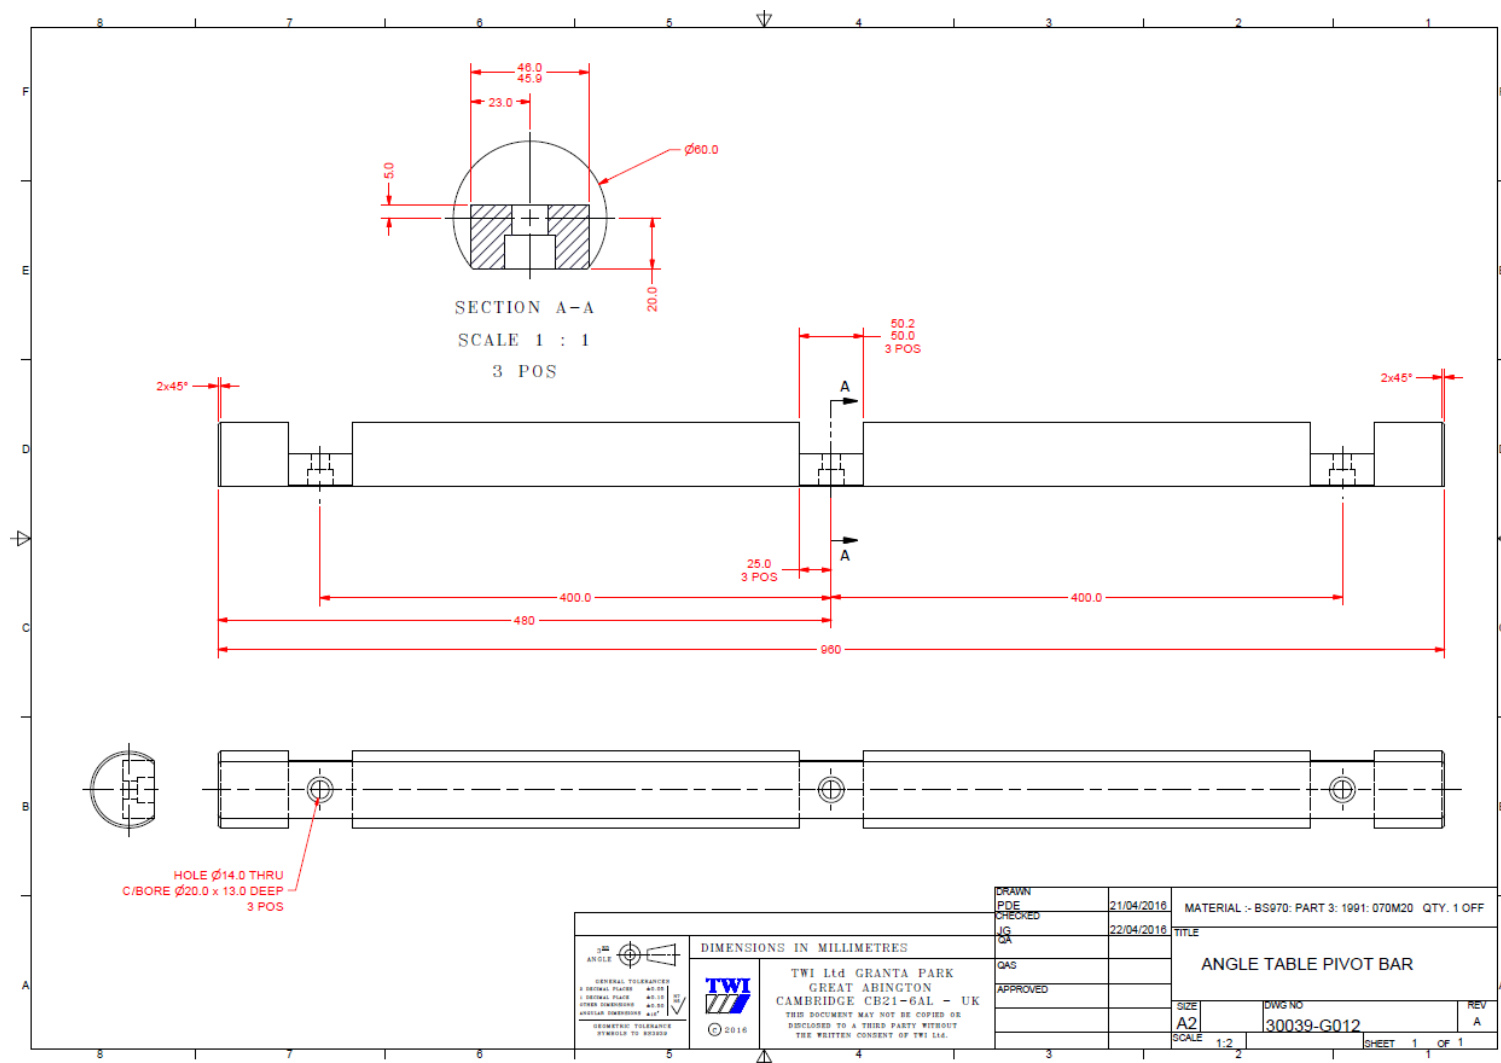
Technical drawing of the pivot bar of the tilting table.
